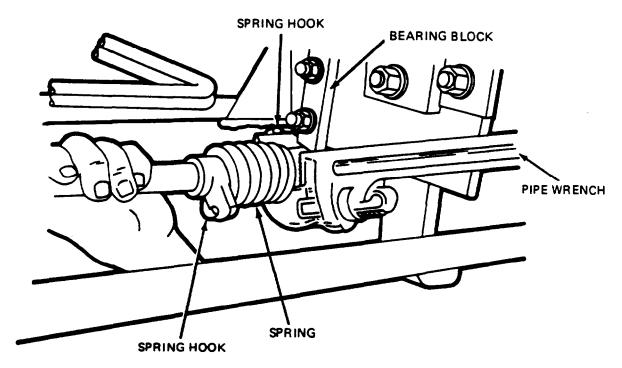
Disassemble/Assemble Subframe (Sheet 2 of 2).
